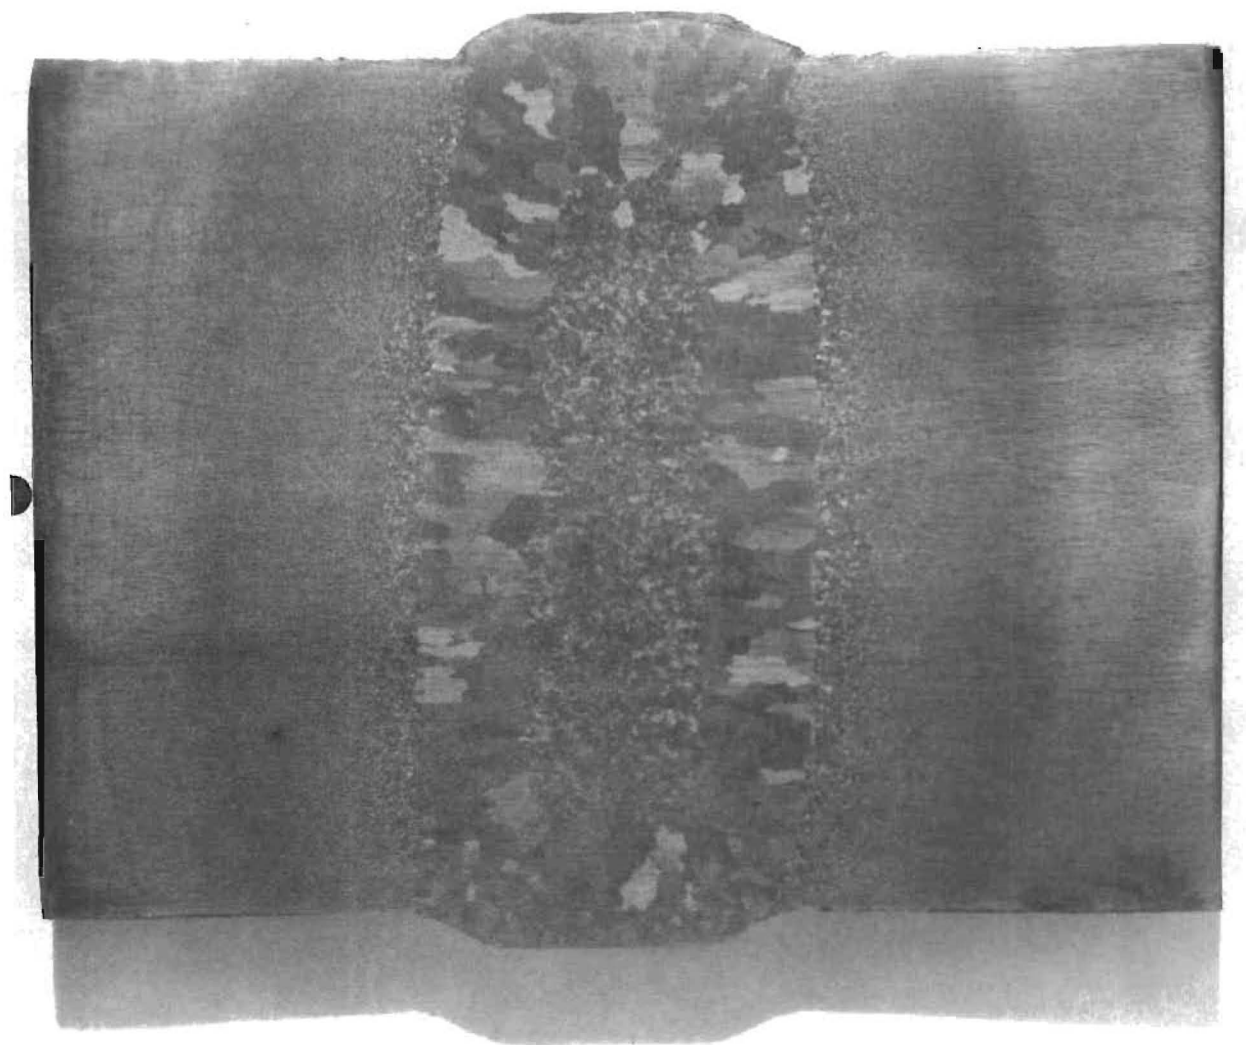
A cross section of an electroslag butt weld between 4-inch-thick T-1 steel plates illustrating the coarse grain structure near the periphery of the weld metal (from Ref 5).
